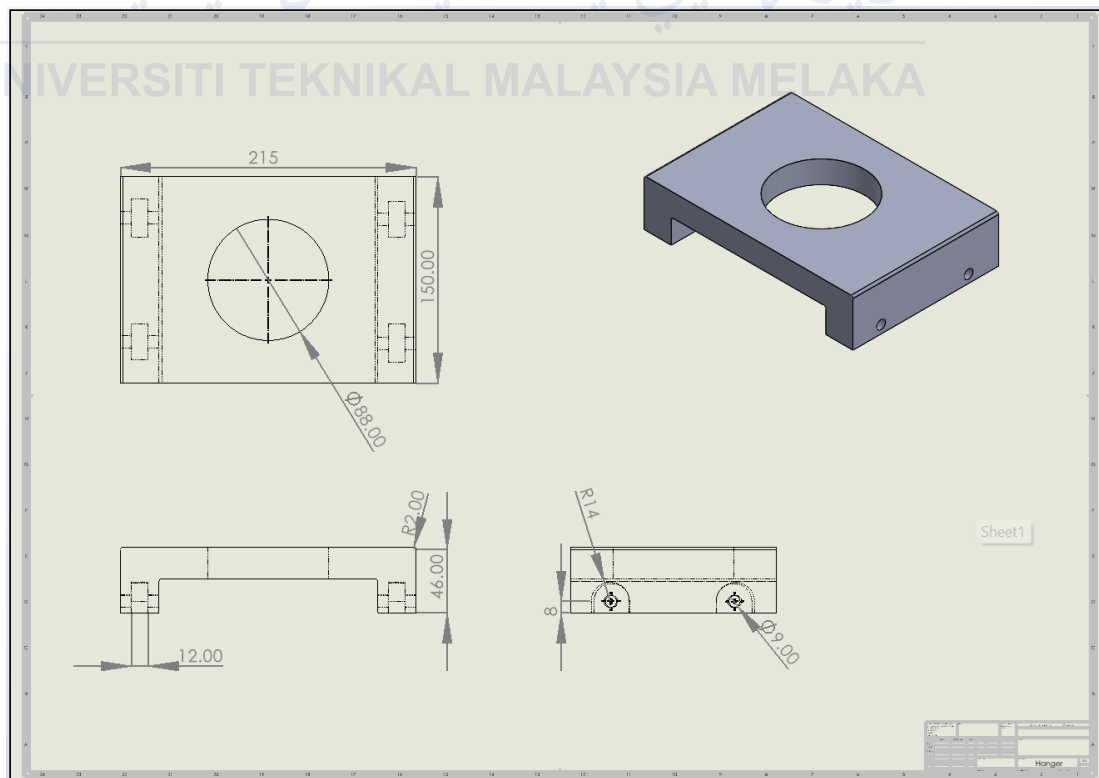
Isometric Drawing of Pipe Hanging Part
